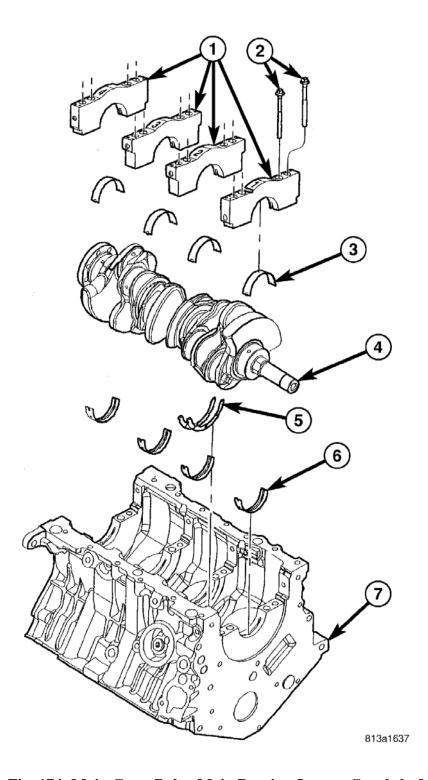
Main Caps, Bolts, Main Bearing-Lower, Crankshaft, Thrust Washers, Main Bearing-Upper & Engine Block
